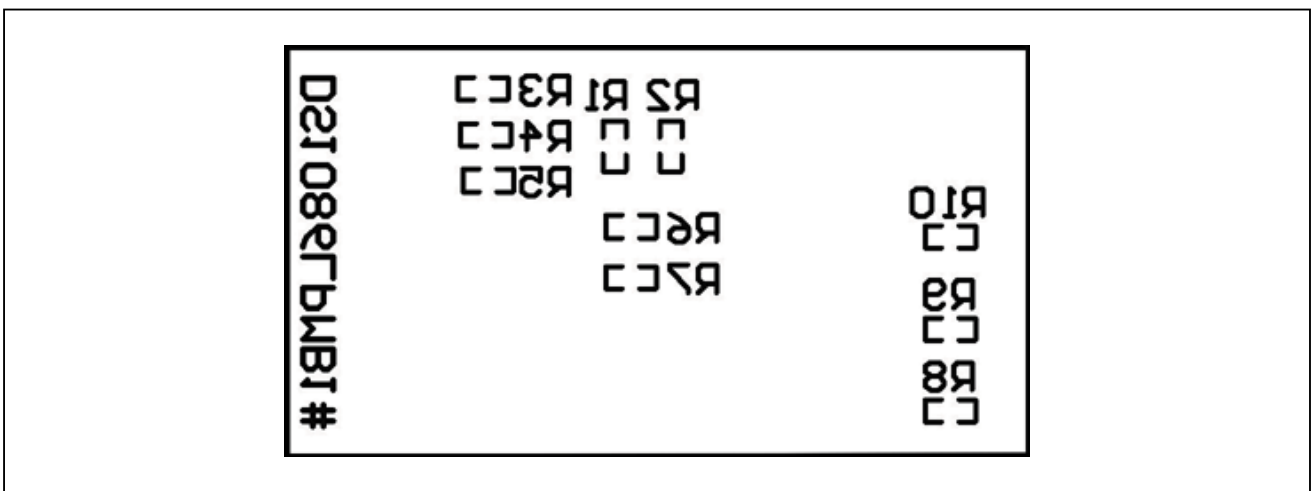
DS1086LPMB1 Peripheral Module Component Placement Guide—Solder Side
